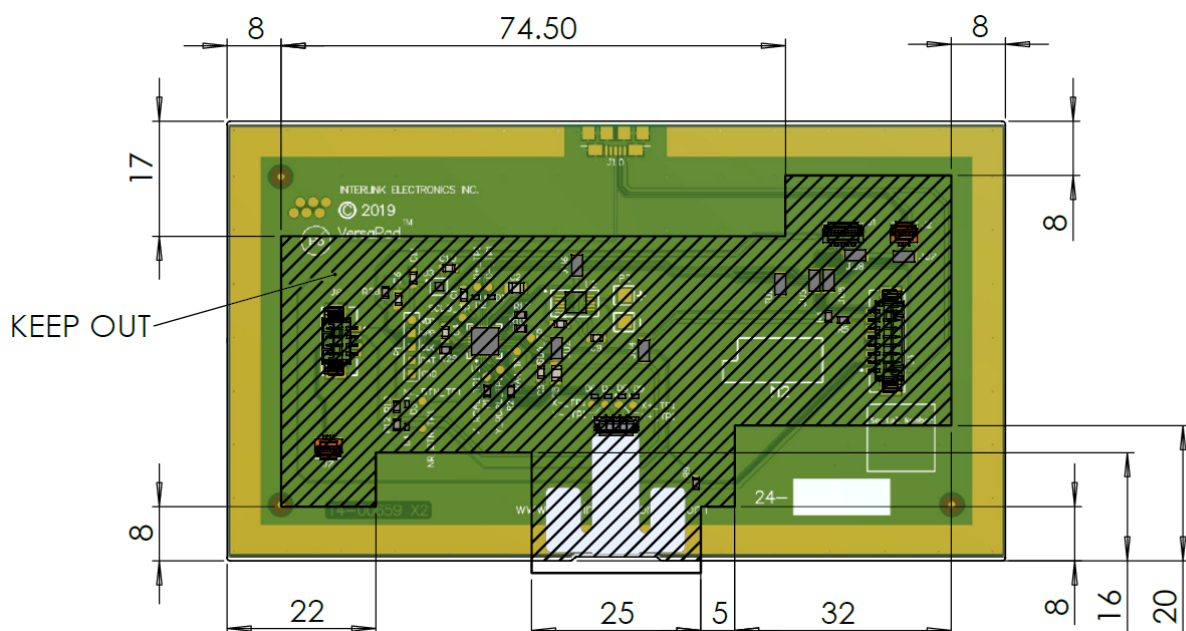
Mounting Bracket & Keep out Area. Drawing is not to scale.
